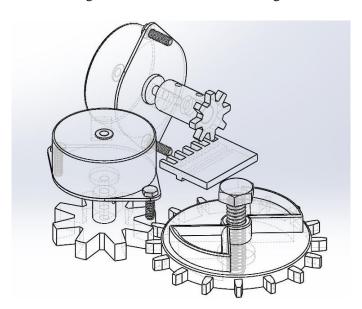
Stepper Motors and Gears for the Horizontal Wheel Design
